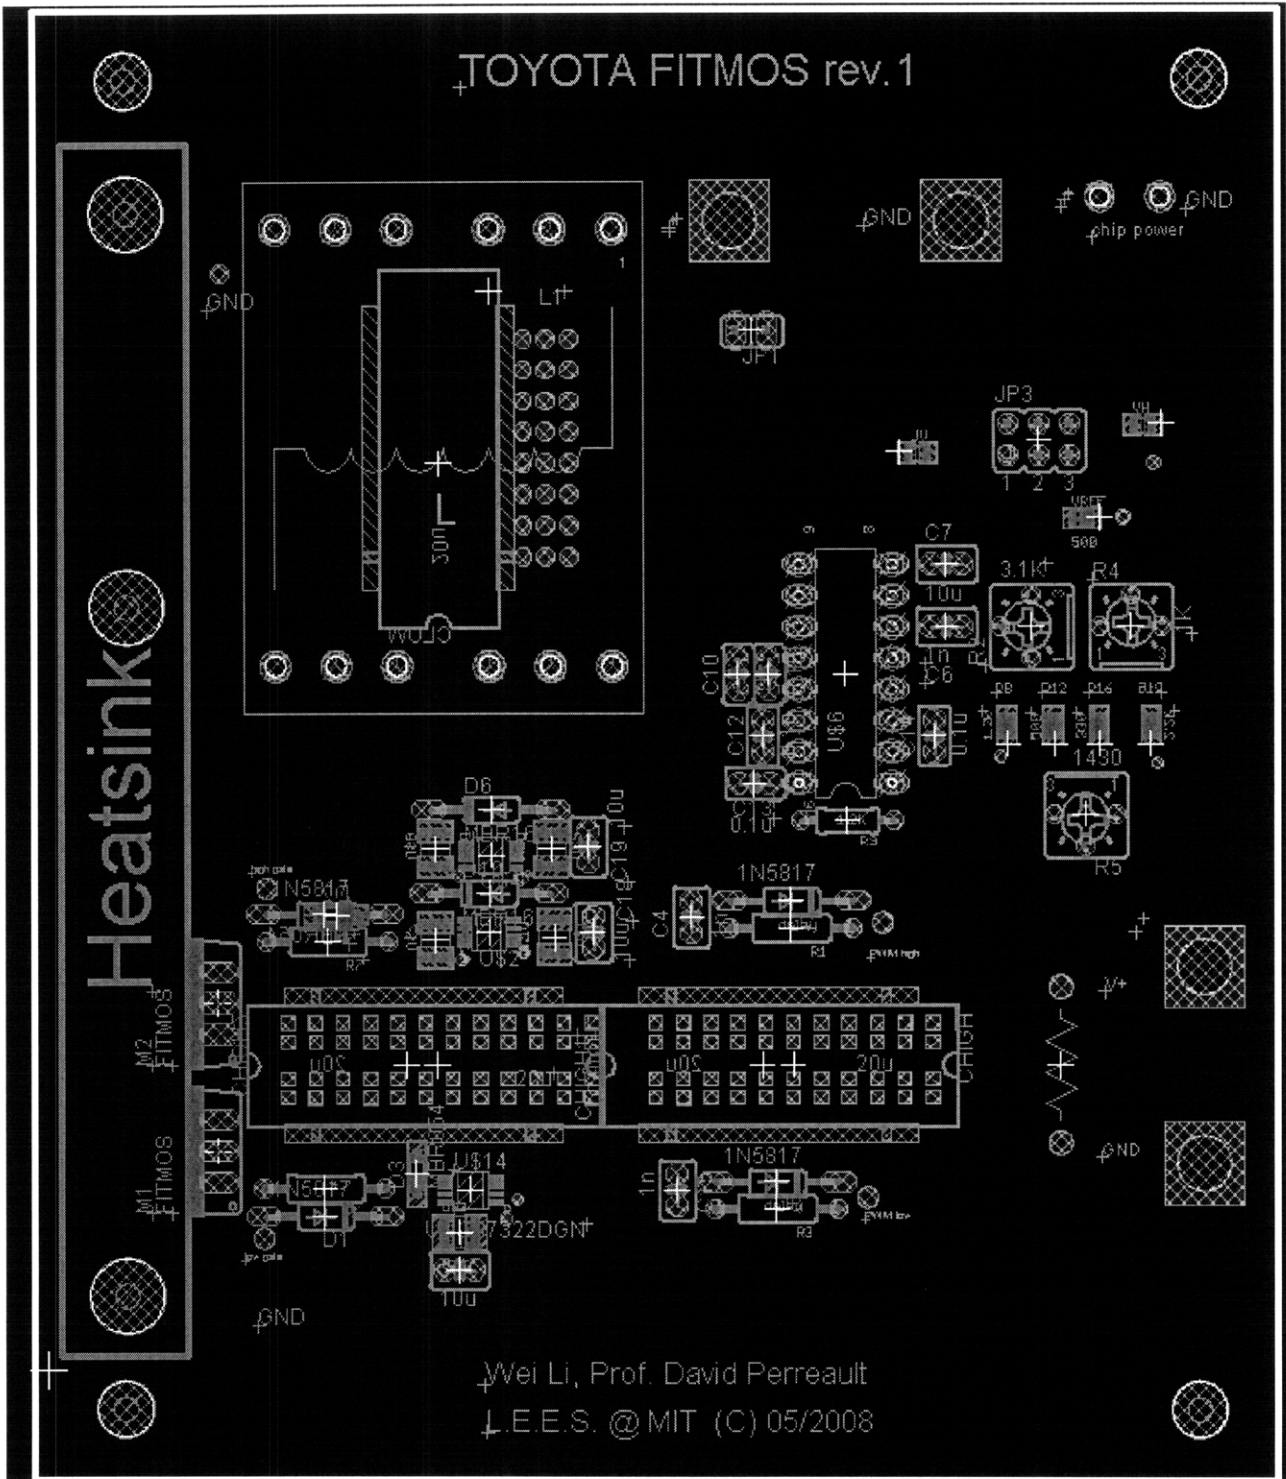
The fourth layer PCB layout drawn in EAGLE.
